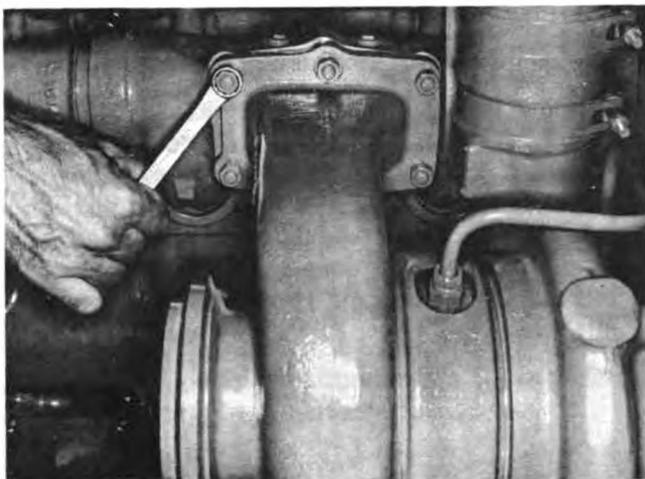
, (N11953). Tightening turbocharger mounting marks
